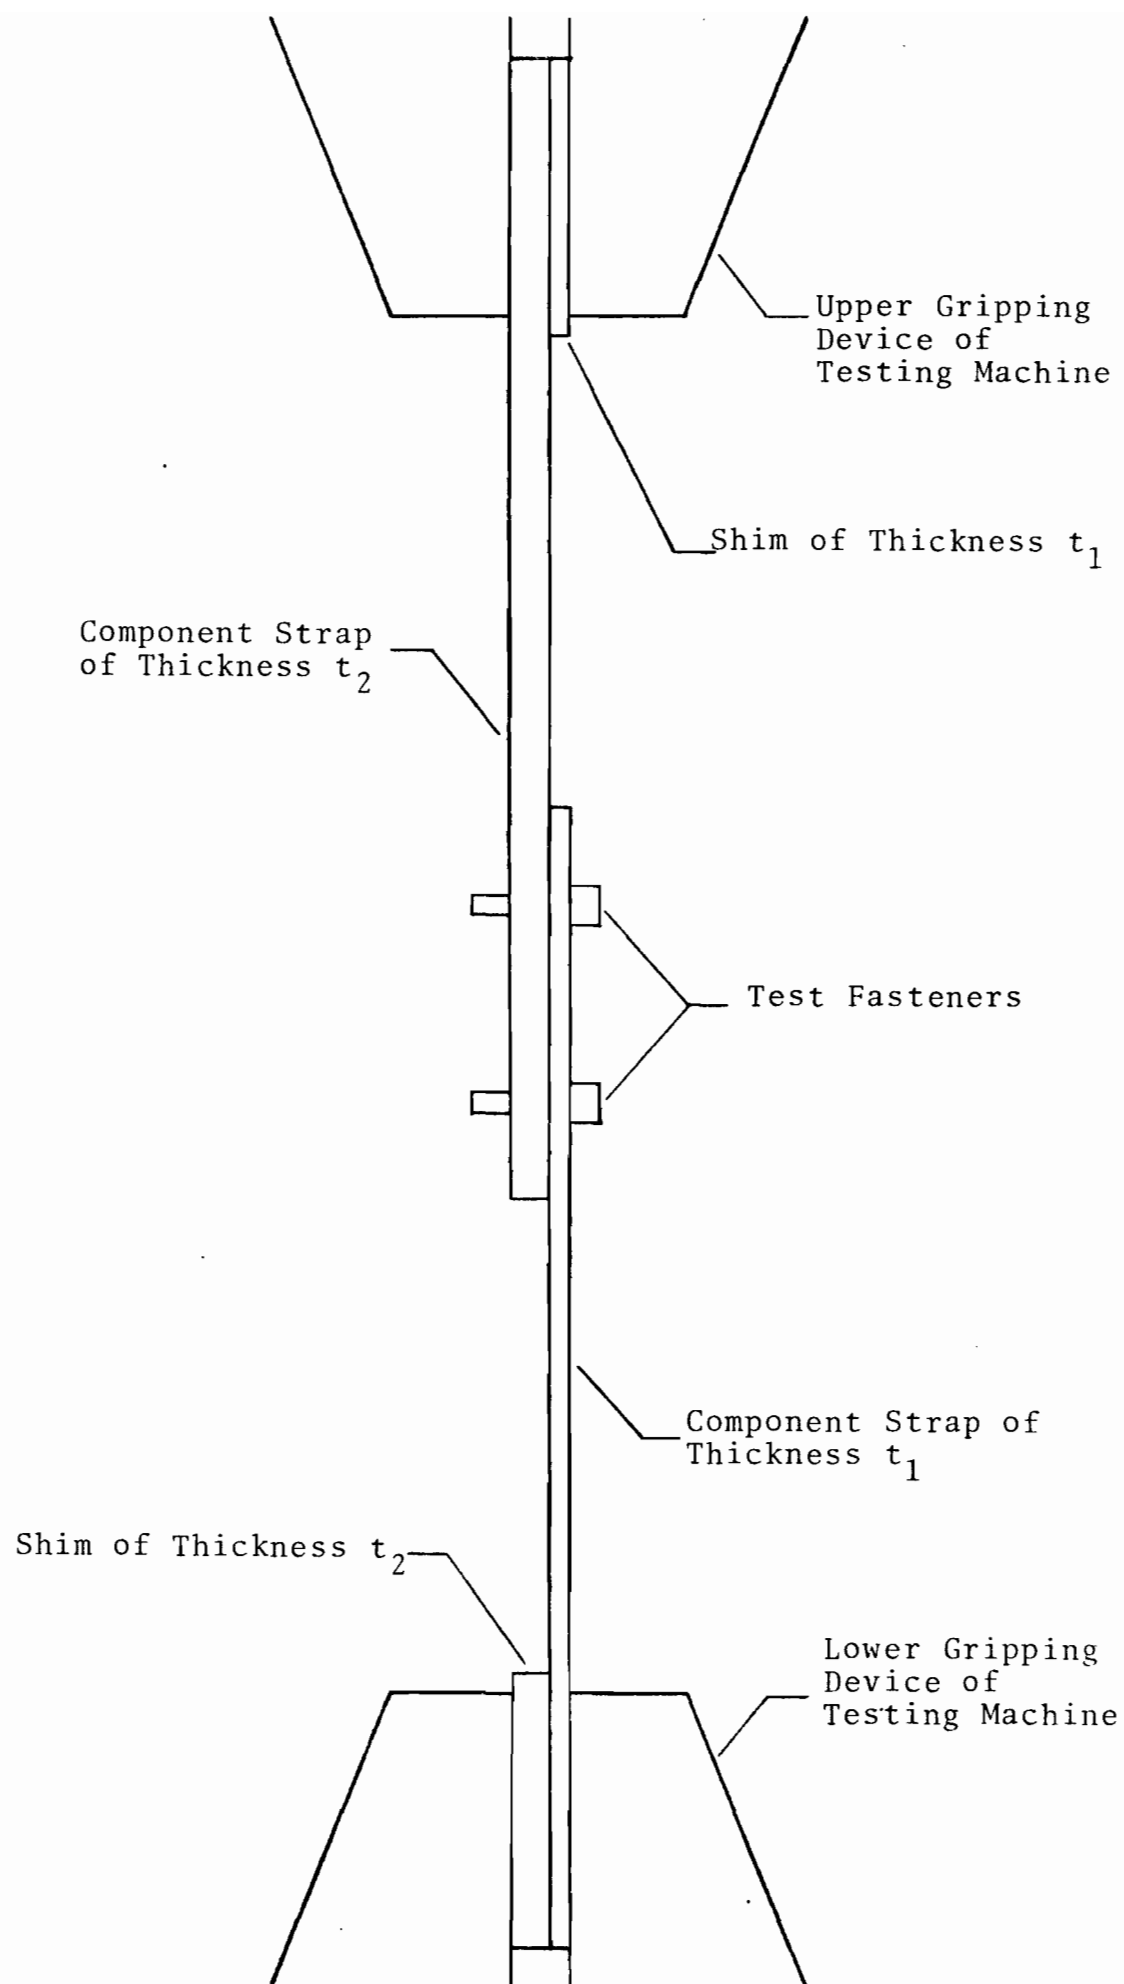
TEST SPECIMEN CONFIGURATION WITH SHIMS FOR SINGLE-SHEAR (LAP JOINT) TEST
